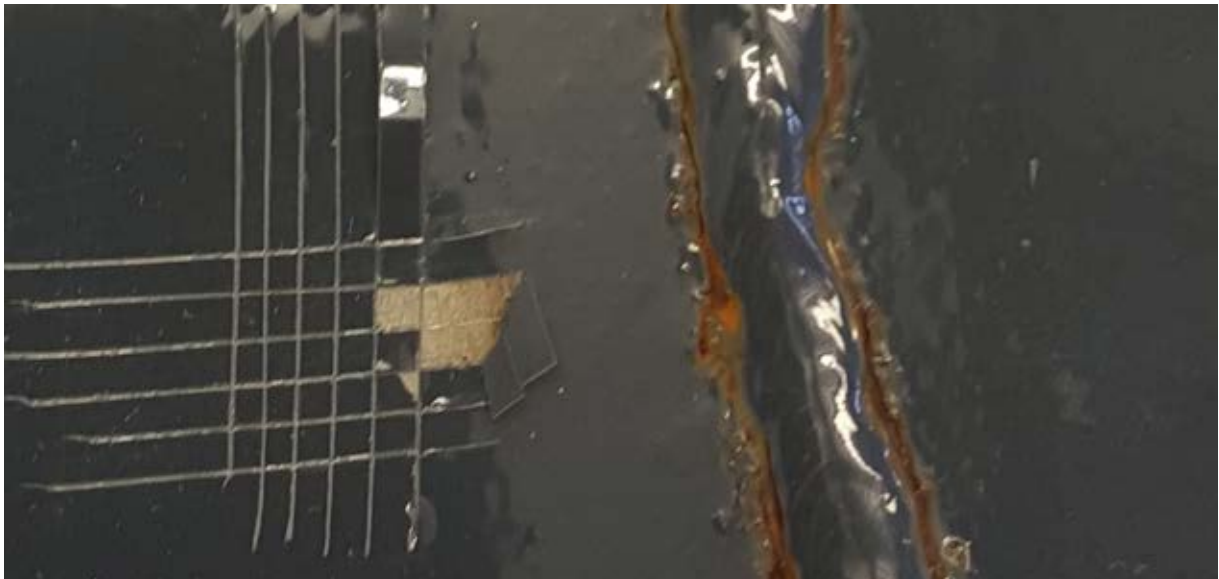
Project C5 test panel with unprepared weld seam only after 168 h neutral salt spray test
